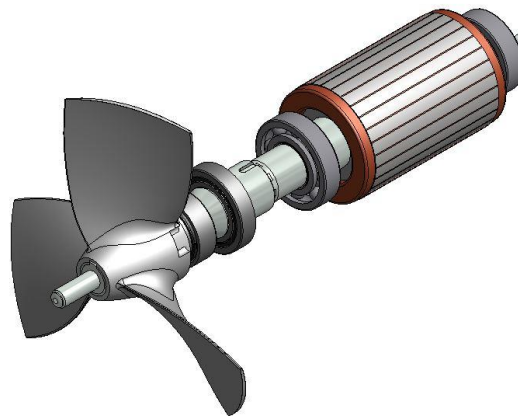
Thruster driveline (courtesy of IKM Technology).
